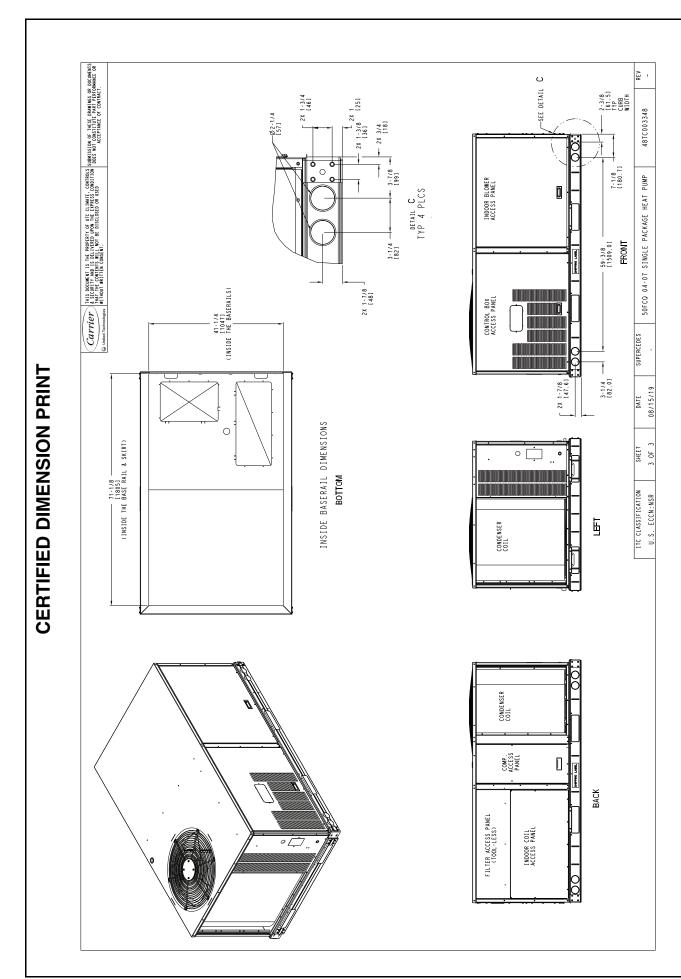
50FCQ*04-07 Dimensional Drawing (cont)
